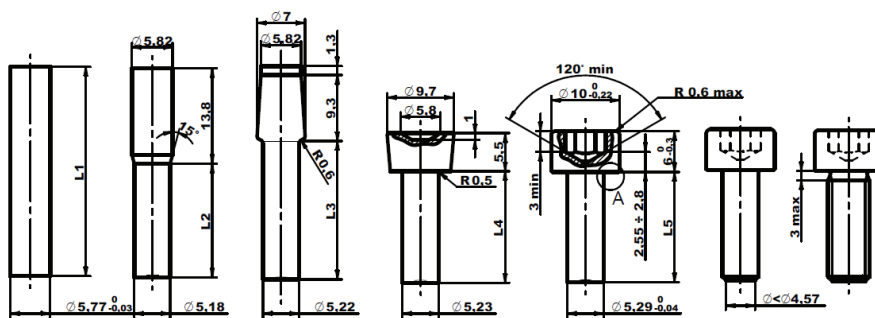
Modified technology for forging of the investigated screw M6x20.
